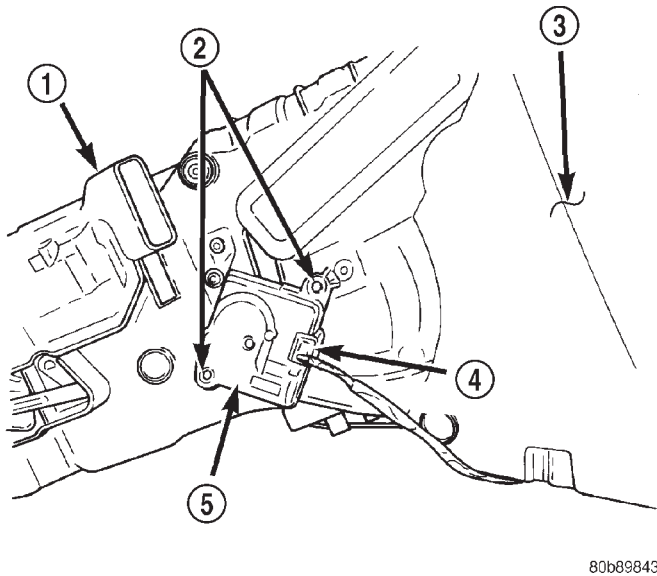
BLEND DOOR ACTUATOR REMOVE/INSTALL
